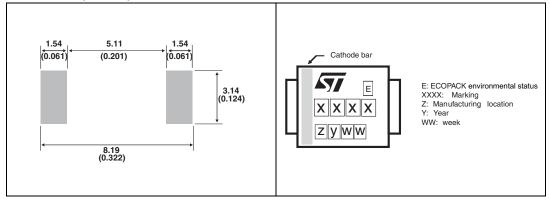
Footprint dimensions in mm Figure 12. Marking layout (inches)
